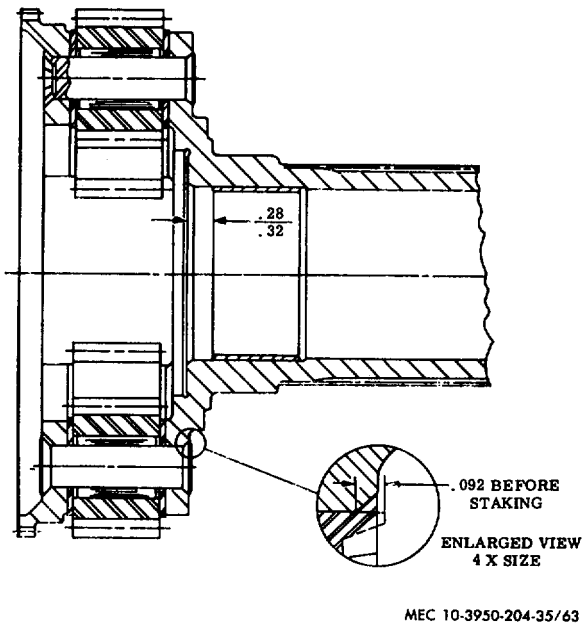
Forward planetary carrier assembly, cross section, showing spindle and bushing installation dimensions.
